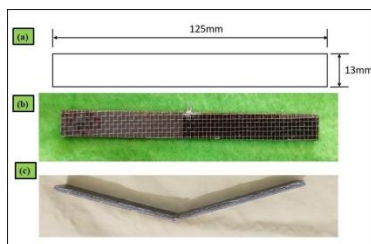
(a) Standard size flexural specimen, (b) Specimen for flexural WBJBJW composite, and (c) Specimen for flexural fractured WBJBJW composite
